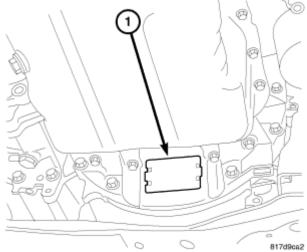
INSPECTION COVER Courtesy of CHRYSLER LLC
